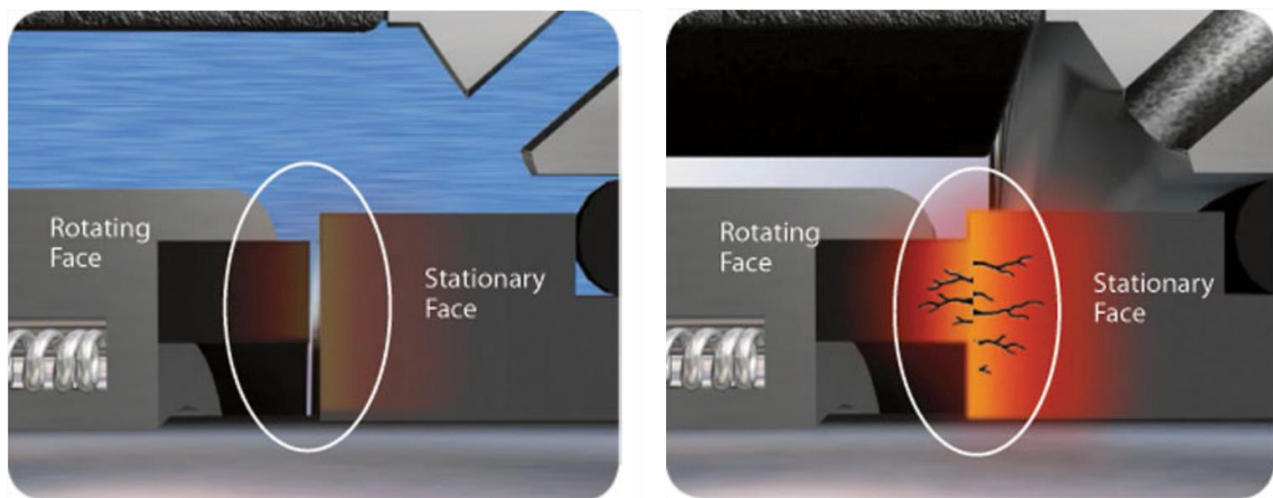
Left: Illustration of properly lubricated mechanical seal faces; Right: Dry-running of mechanical seal faces results in overheating and failure [3].
